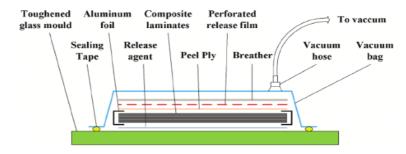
Vacuum Bagging Technique Process (M. S. Ismail, 2019)
